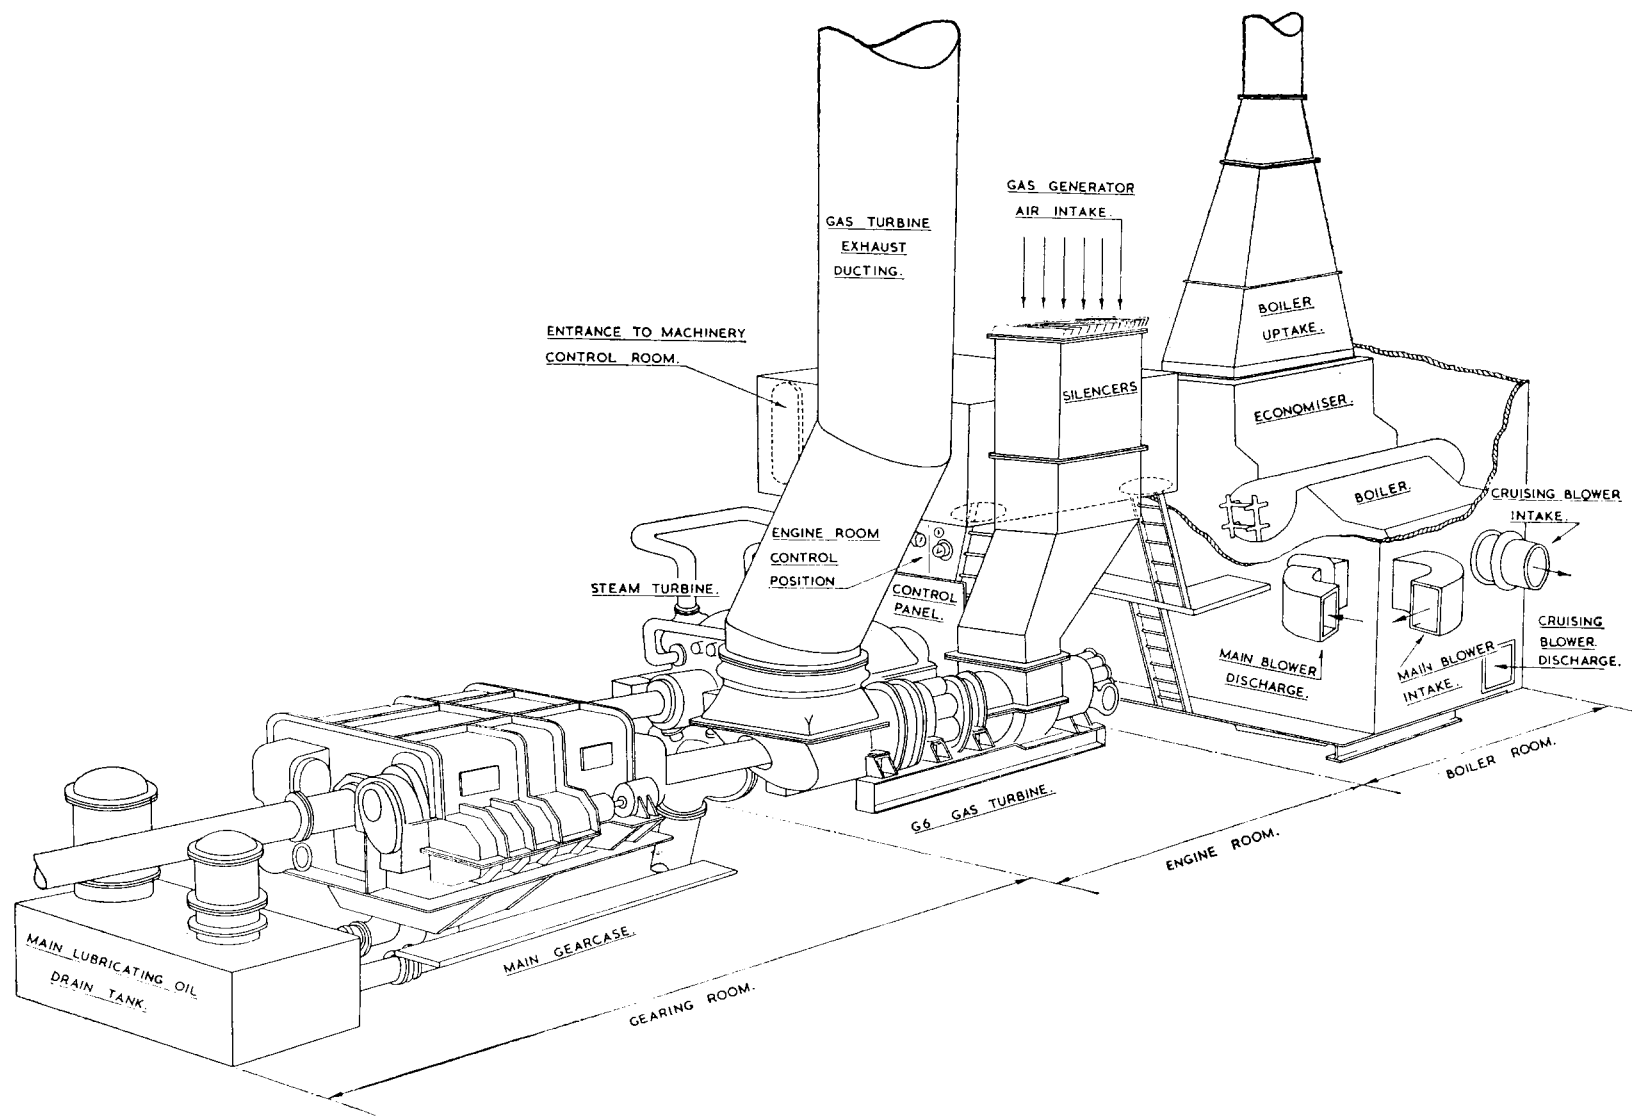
H.M.S. 'ASHANTI'—SKETCH SHOWING MAIN MACHINERY
